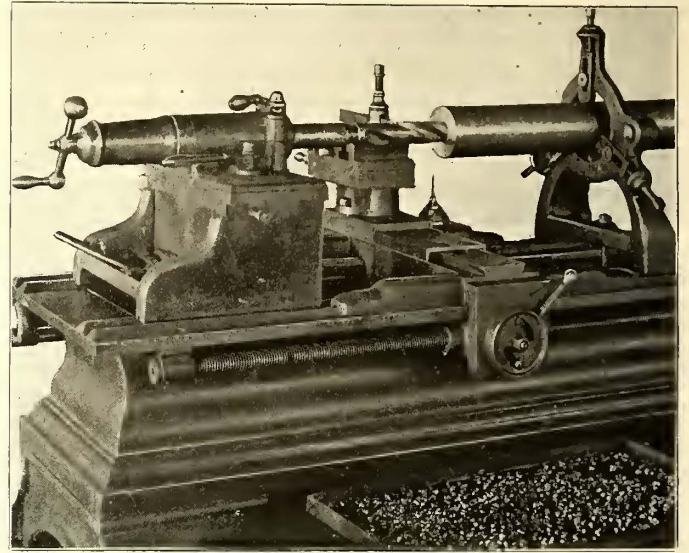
DRILLING AND CUTTING PINION BLANKS FROM HOT ROLLED BAR
